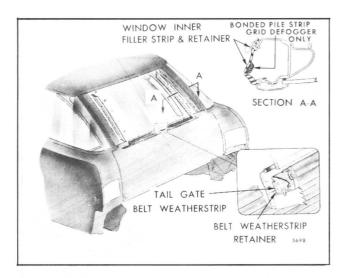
Tailgate Belt Weatherstrip and Window Inner Filler Strip
